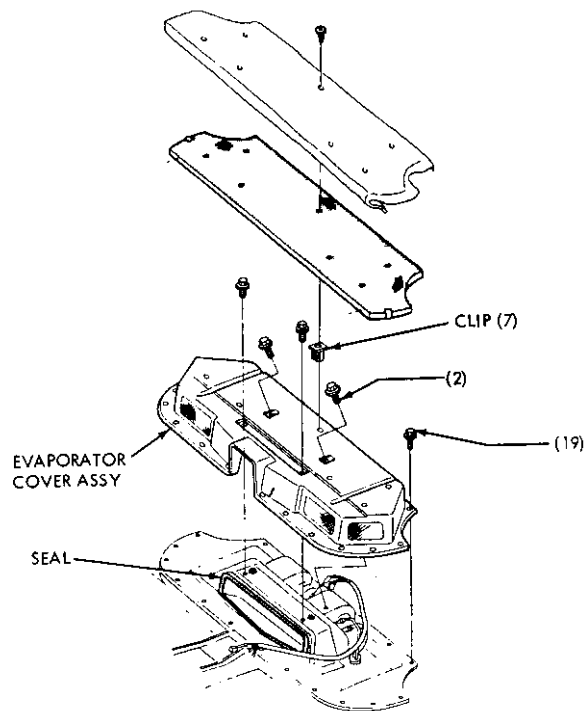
B-201 Evaporator Cover Assembly and Attaching Screws
